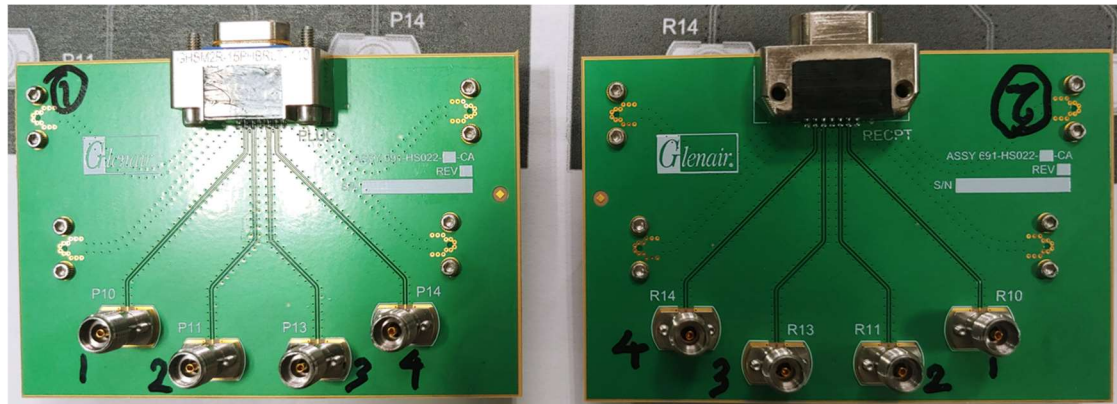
Right-Angle GHSM (HBR) Test PCB Set
